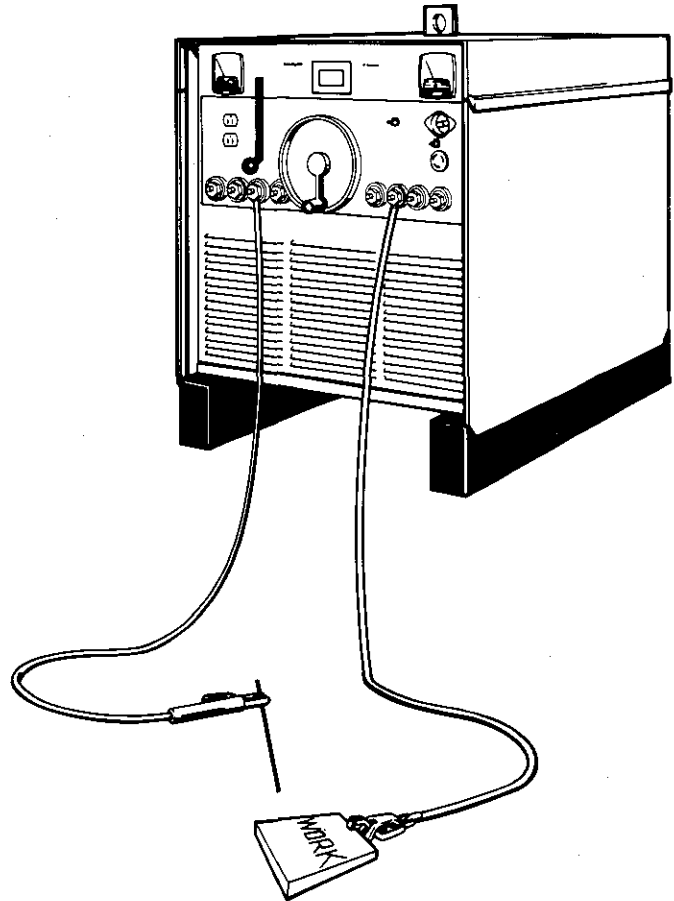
Connections for Shielded Metal-Arc Welding (SMAW)
